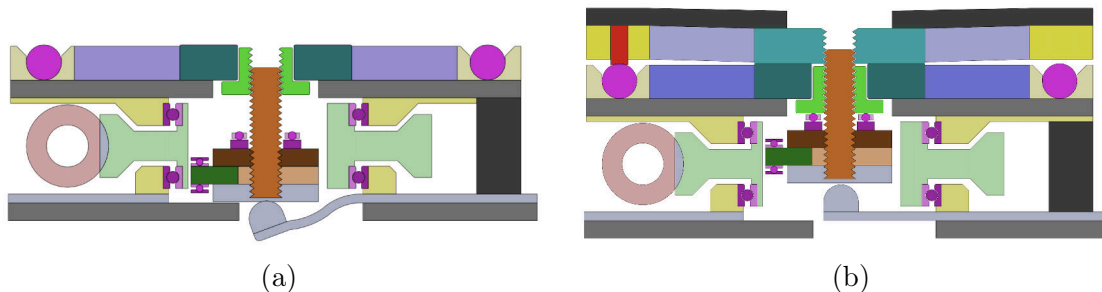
Cross sectional view of the AutoBolt connector mechanism. (a) shows an AutoBolt connector in the retracted state, with the flexural spring at maximum deflection. In this state, no parts of the mechanism extend past the connection plane. (b) shows the connector while it is attached to an adjacent module. The angle shown between the two shades of purple is an exaggeration of the slight flexing (nominally 0.05 mm) of the connector when bolted at full strength. This preloads the kinematic coupling and effectively turns it into a quasi-kinematic coupling [91], as it is constrained by both the interface between the two steel plates (*teal, lighter teal*) as well as the kinematic coupling teeth. This is an optional design feature, as if the top steel plate and structure are stiff enough, it will behave as a traditional kinematic coupling where all of the compressive forces are transmitted through the six points of contact of the kinematic elements.
